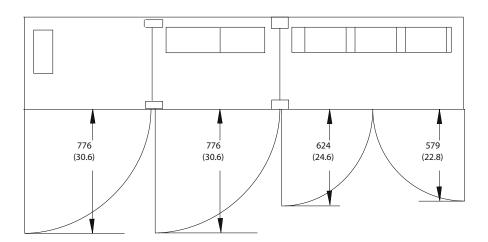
Front, Side, and Door Clearance Dimensions for F13
